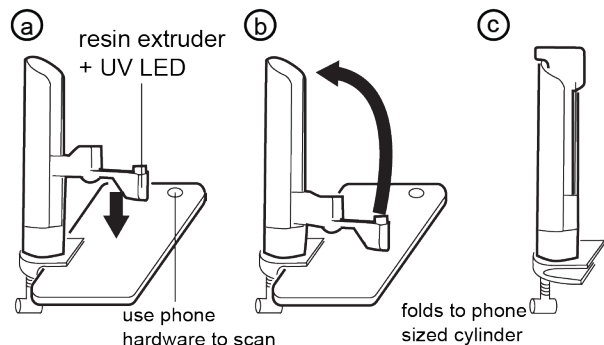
(a) Mock-up of one possible future mobile fabrication device that clips onto the phone as build platform and attaches to surfaces to produce directly on them. (c) Folded up to fit in a pocket.
